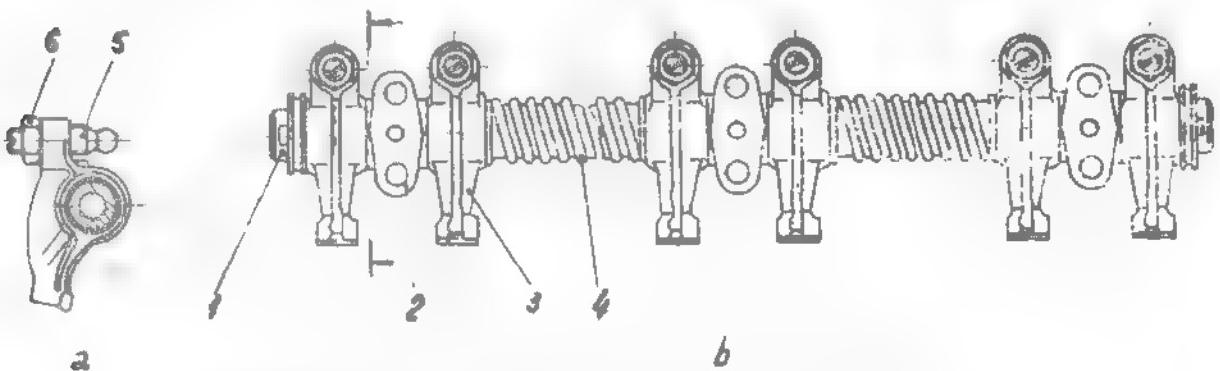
ROCKER ARM SHAFT (Assy)
